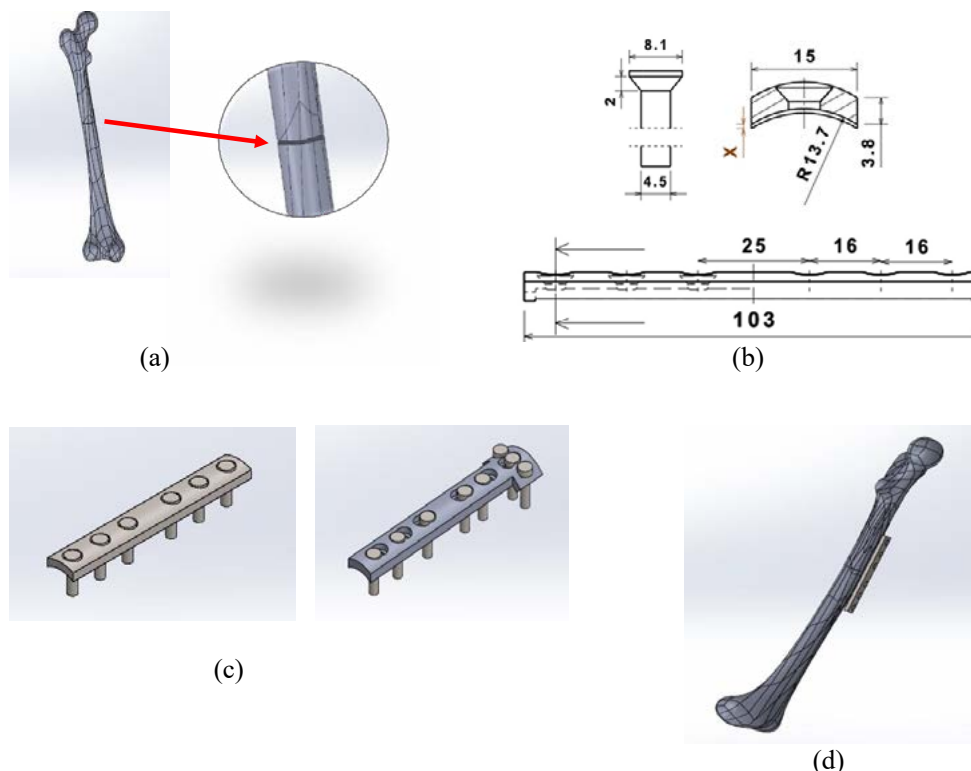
(a) Representation of Fracture (b) 4.5mm Bone Plate Dimension [39] (c) 4.5/5mm DCP and LCP (d) Assemble of Fractured Parts and Plates
